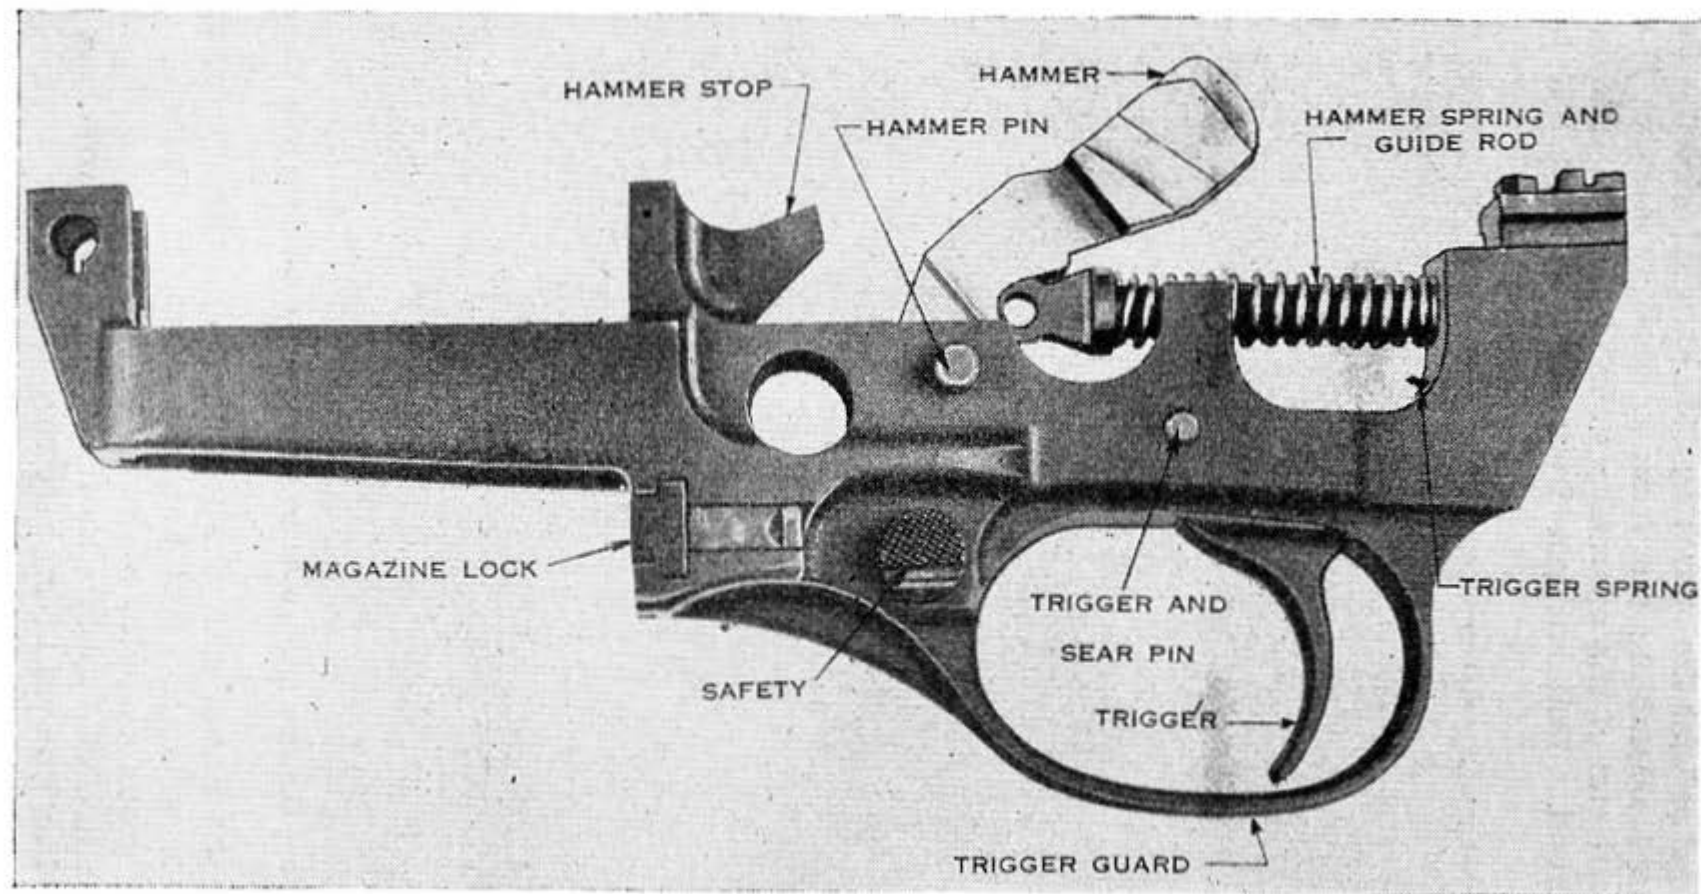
Trigger group assembly with hammer in cocked position.
